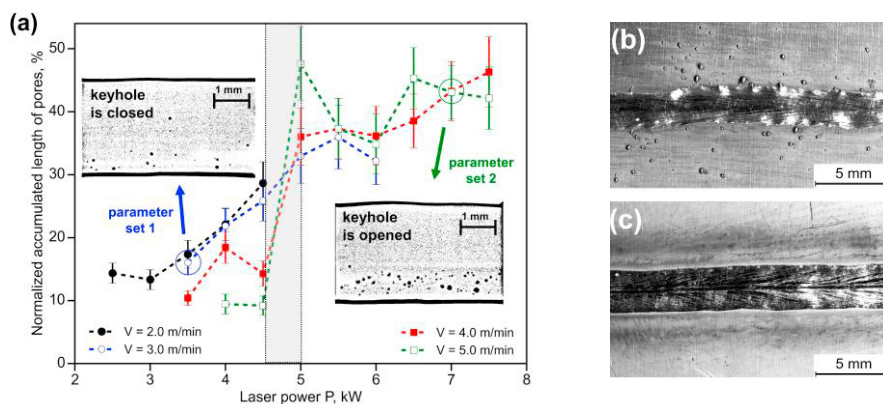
(a) Effect of the LBW process parameters on the porosity level; (b) spatter on the bottom side of the weld due to the open keyhole (welded with parameter set 2); (c) bottom side of the joint after the LBW with closed keyhole (welded with parameter set 1).
